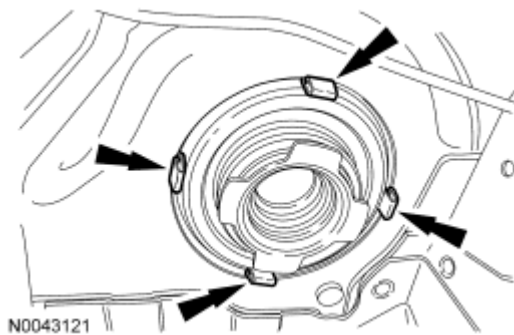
Locating Steering Column Shaft-To-Dash Seal
